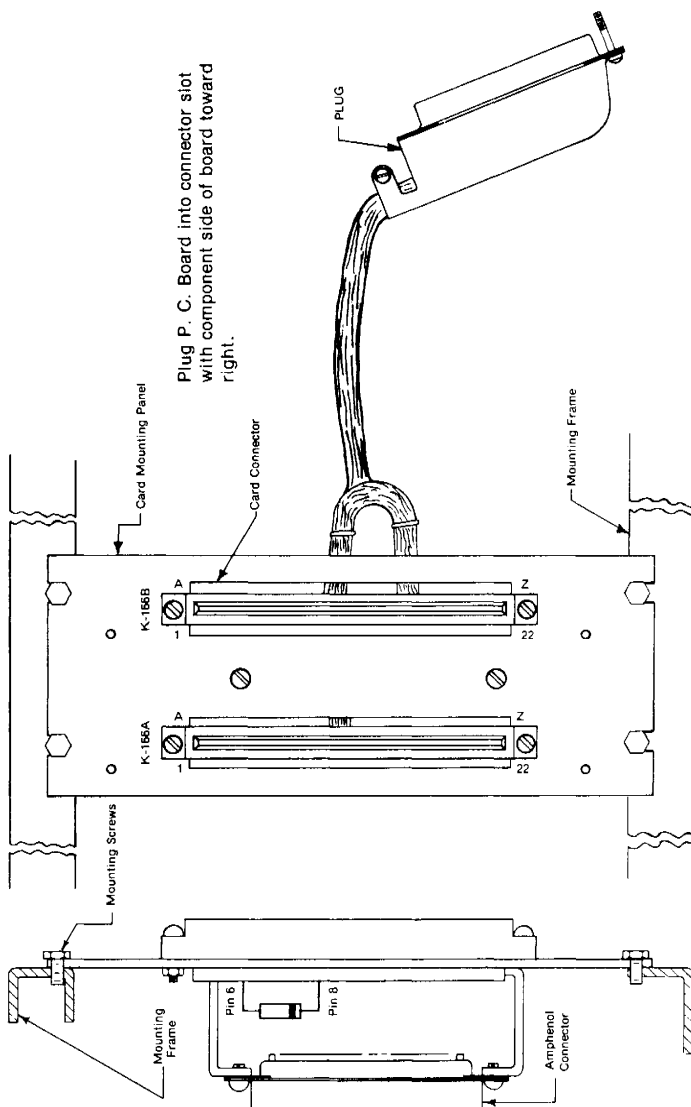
Install Tel-Touch Adapter Panel to Front of KSU Mounting Frame.
